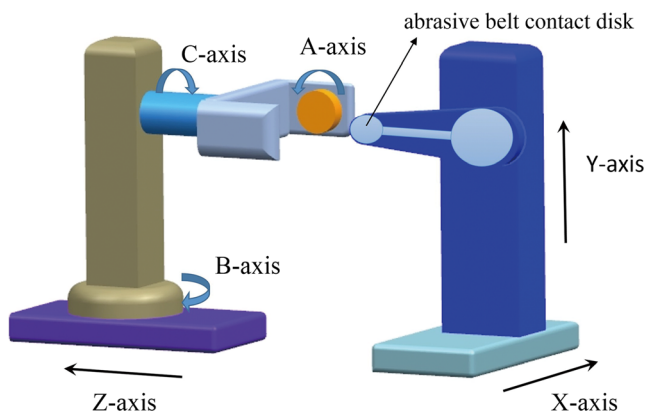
Structure of the six-axis NC belt grinding machine tools
